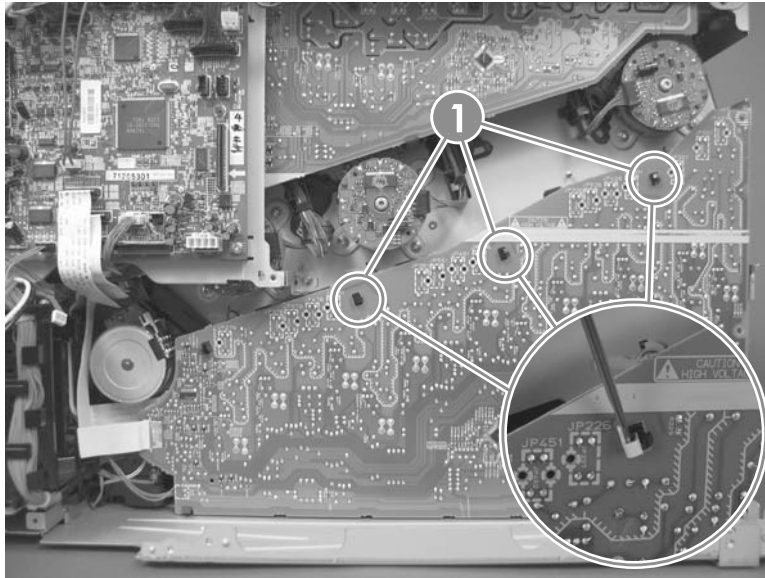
Remove the high-voltage power supply lower (1 of 4)
